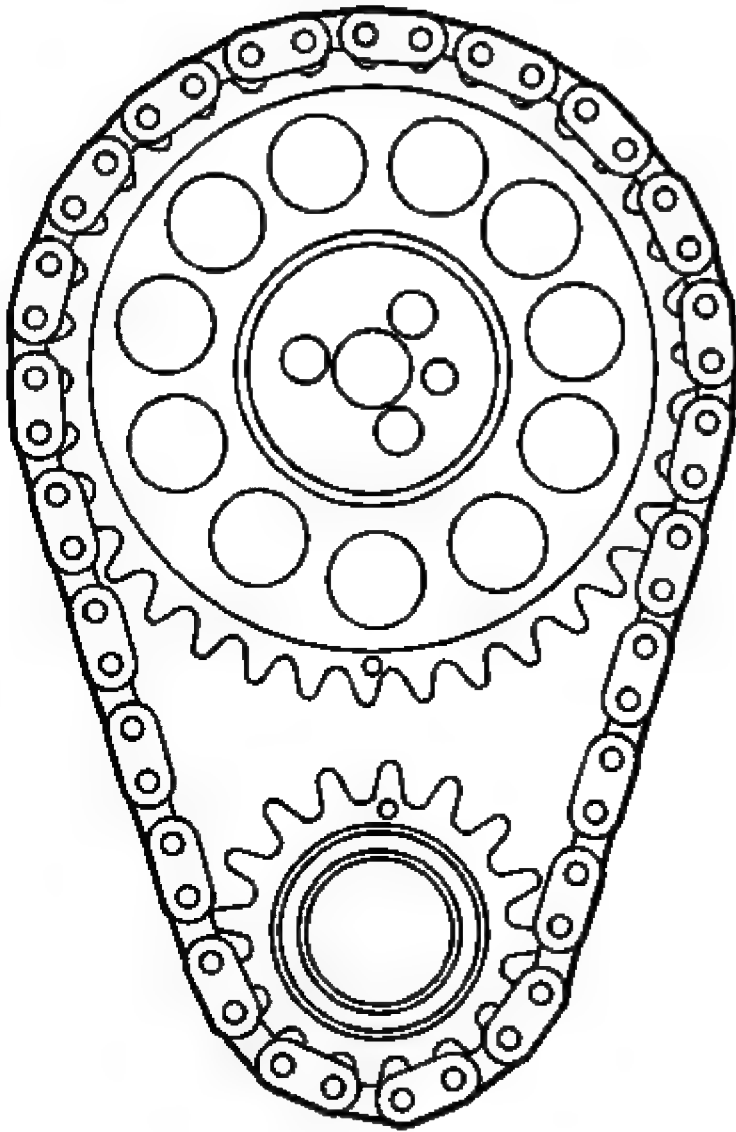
View Of Camshaft & Crankshaft Sprocket Timing Marks
